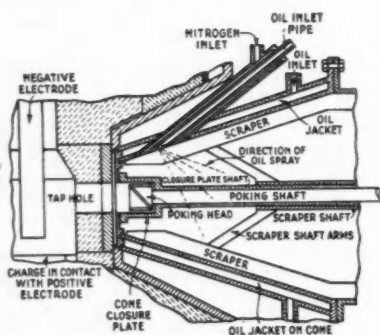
Enlarged view of quenching cone (see Fig. 5), showing relation of tap hole, oil sprays, and poking and scraper shafts (B.P. 559,866).
